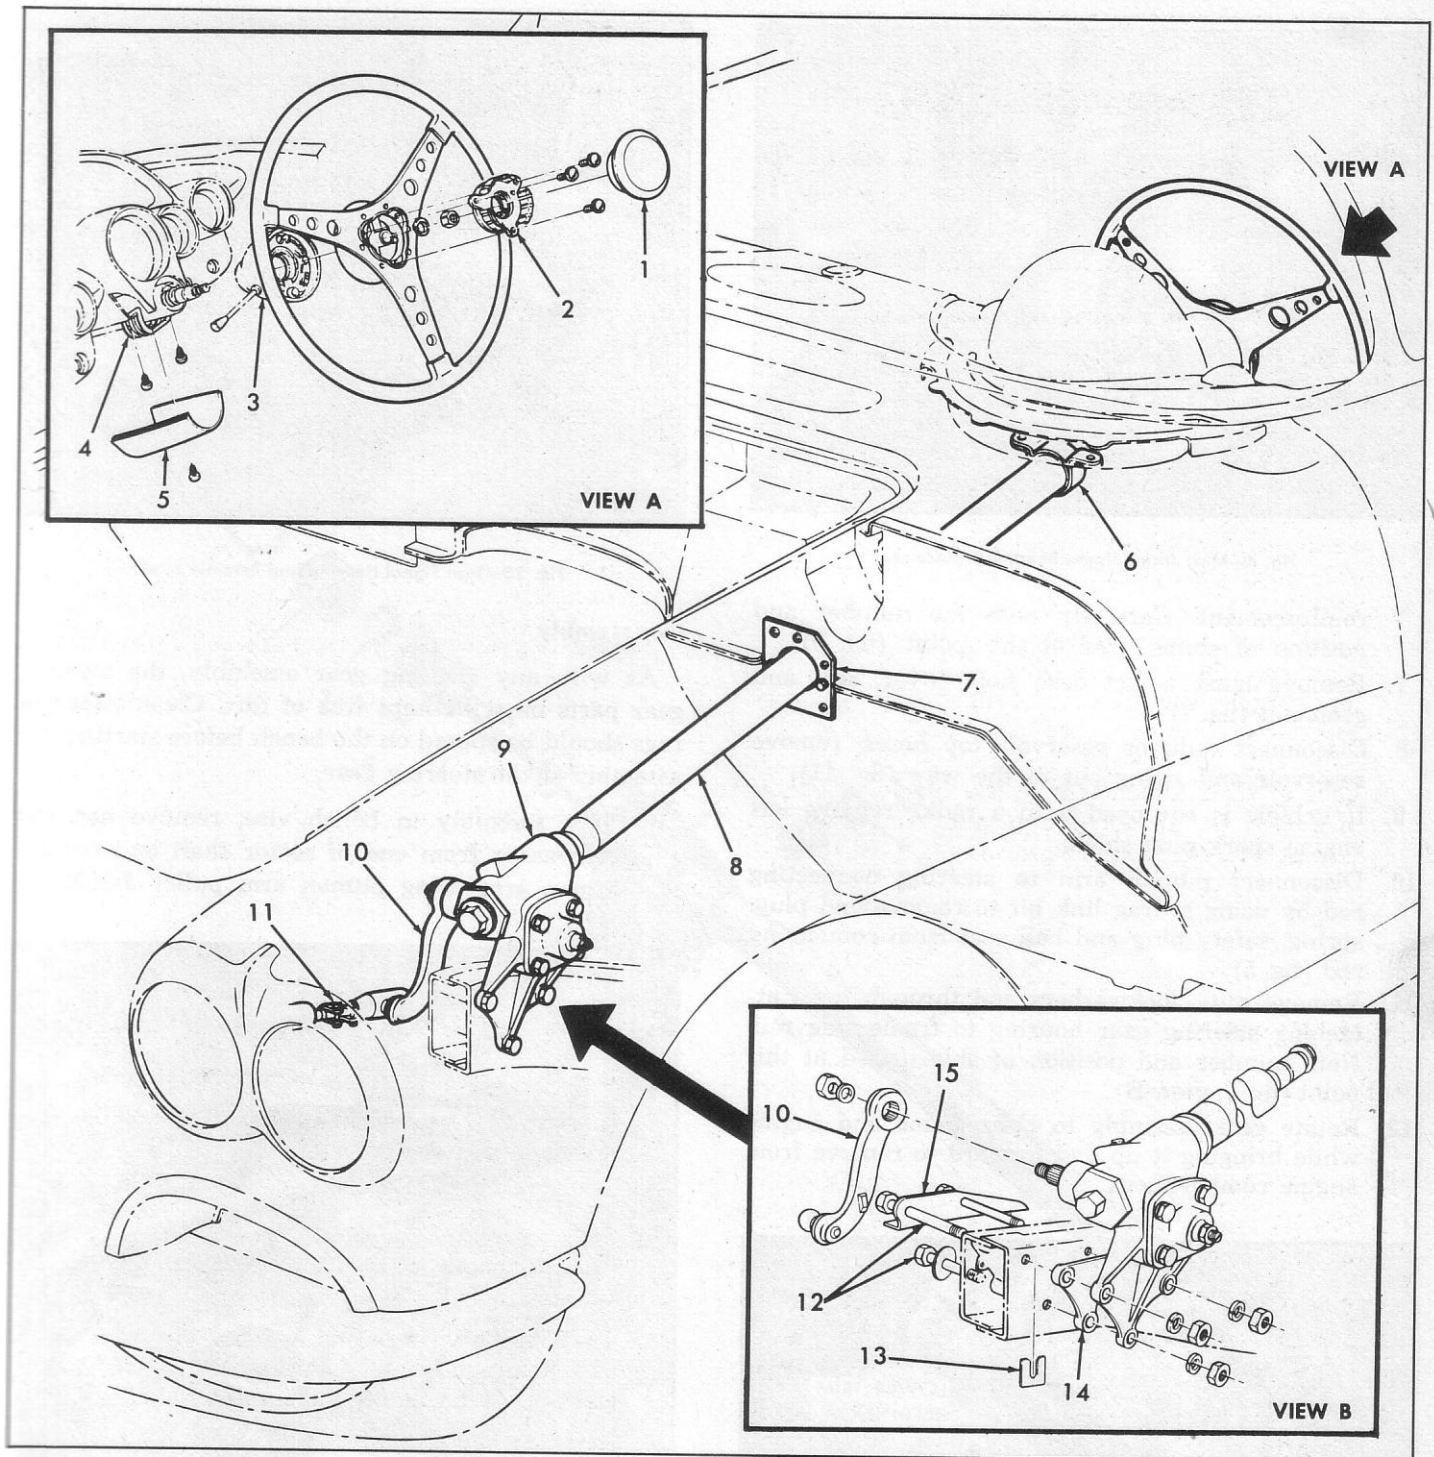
Steering Gear, Mast Jacket, and Steering Wheel
